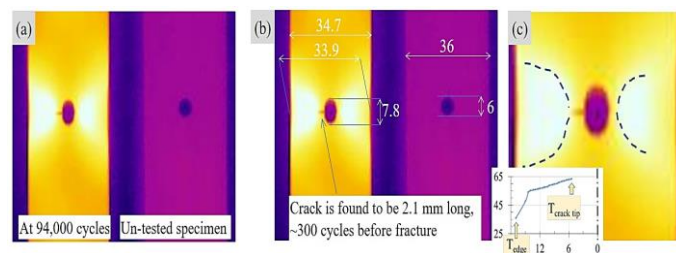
(a) Specimen with a hole showing fatigue crack just before failure.
